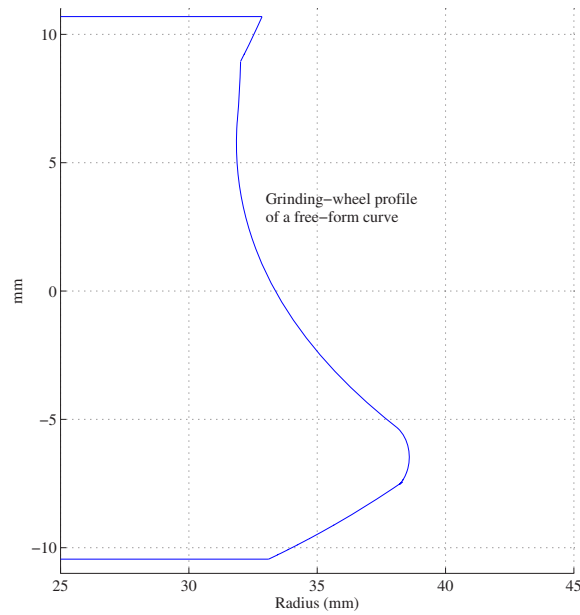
The grinding-wheel profile determined using the inverse method based on the designed flute profile at the larger tool end.
